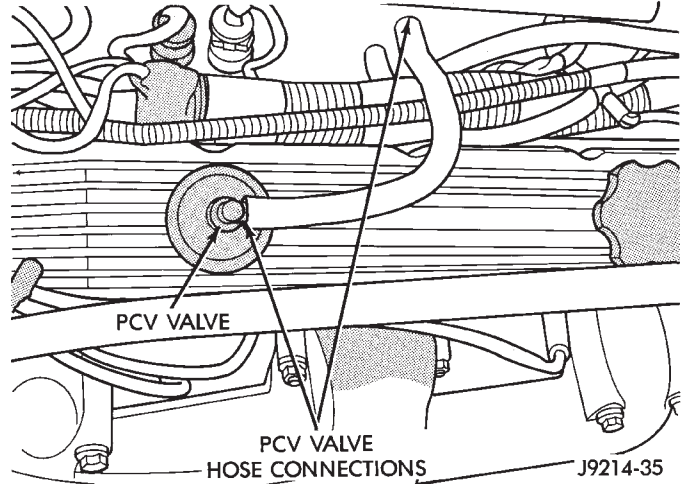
PCV Valve Hose Connections—5.2L Engines—Typical
